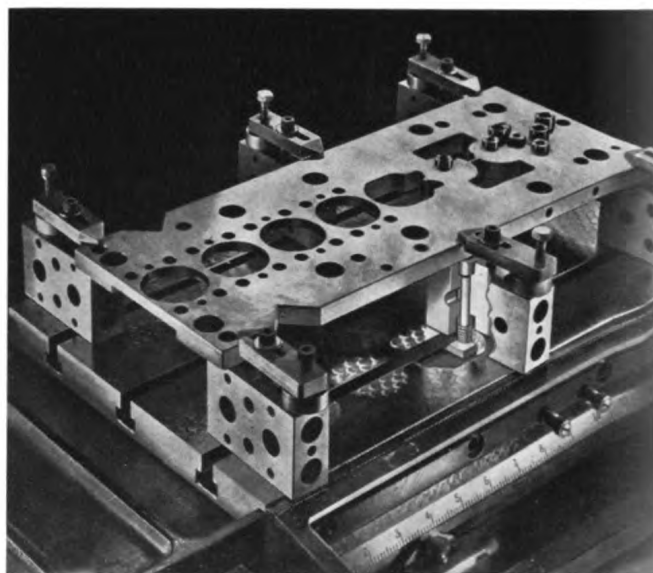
Blocks may be positioned to provide support for long workpieces without interfering with machining locations.
